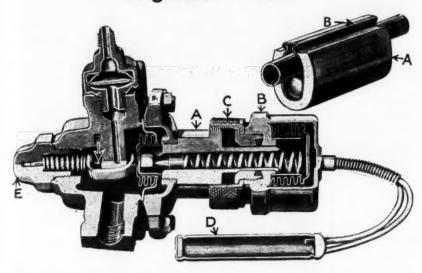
Frigidaire thermostatic expansion valve. In the main part of the illustration "A" designates an insulator which is placed on the valve to break the contact between the metal housing of the thermostatic bellows and the metal valve body. "B" is the thermostatic element which may be entirely removed from the valve without damaging the mechanism.
